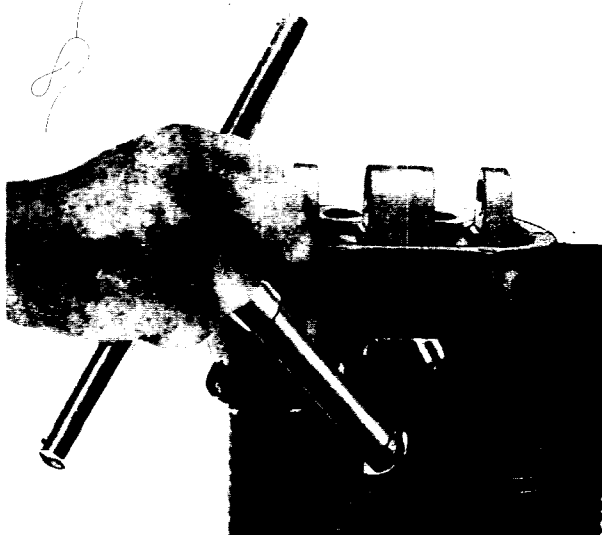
Expanding Spark Plug Hole Heli-Coil Insert
